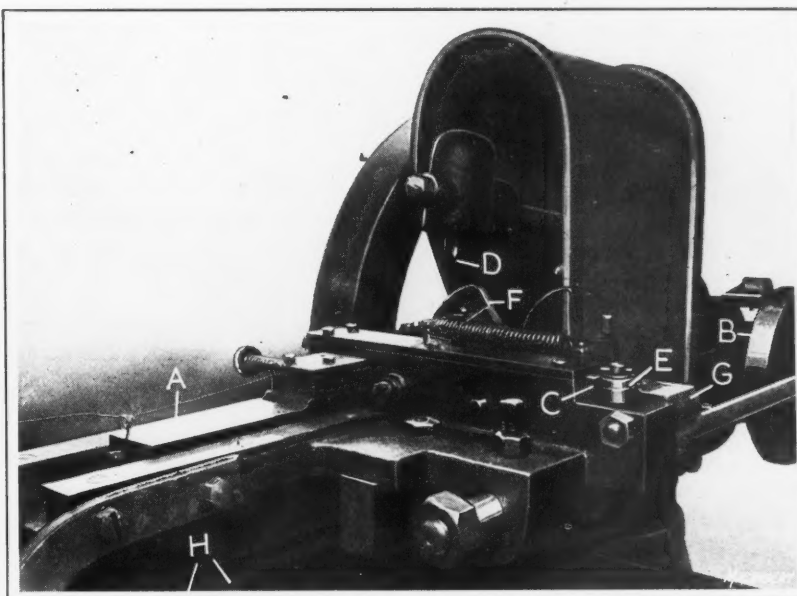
Machine used for forming a Tube on One End of Incandescent Lamp Lead Wires
